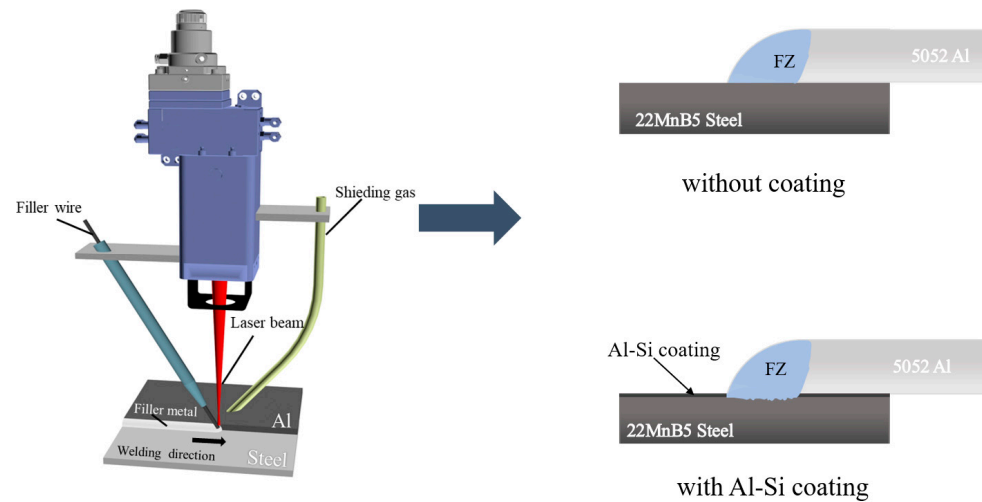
Schematic diagrams of laser welding–brazing of Al/steel.
